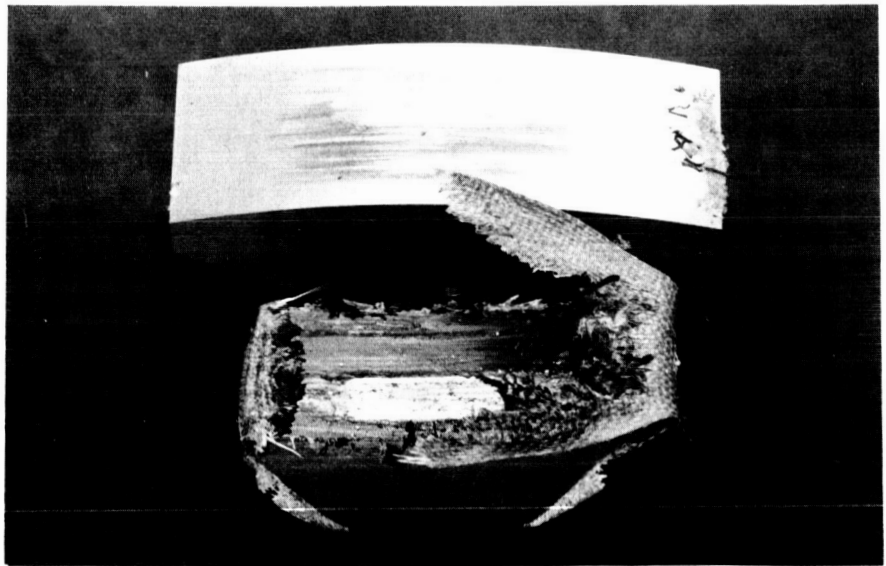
BALL JOINT TEST SPECIMEN TYPE - 18;
